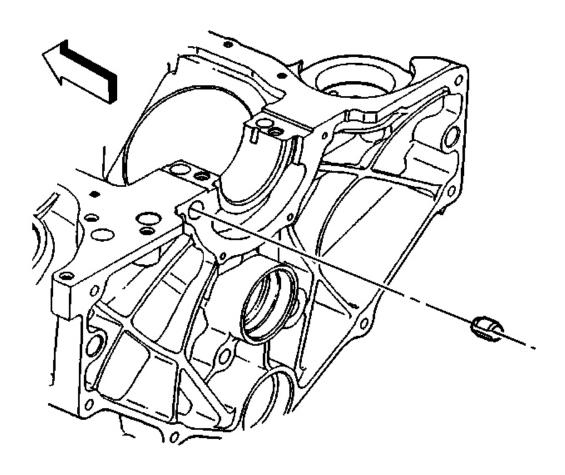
Crankshaft Rear Oil Seal Housing Locator Spring Courtesy of GENERAL MOTORS CORP.
